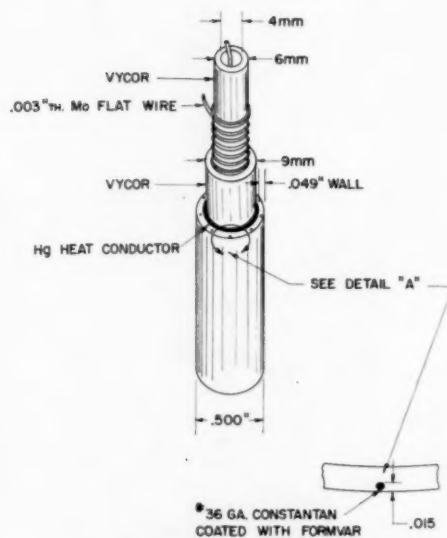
CUTAWAY DRAWING SHOWING CONSTRUCTION AND ASSEMBLY OF TEST ELEMENT
